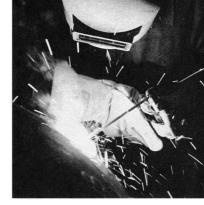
Shielded metal arc welding (stick welding) performed by a (human) welder (photo courtesy of Hobart Brothers Co.).
